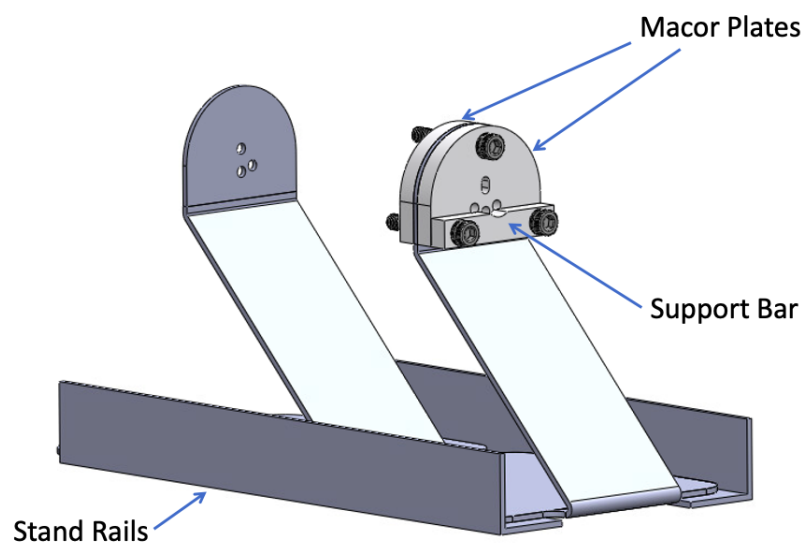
CAD model of the stainless steel stands with the attached macor plates.
